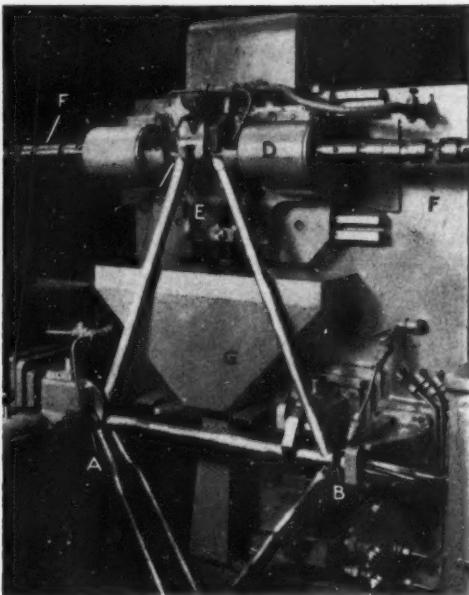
Close-up View of the Machine Shown in Fig. 12. The Cutter Spindles in the Housings *D* are Driven Through Universal-jointed Shafts
